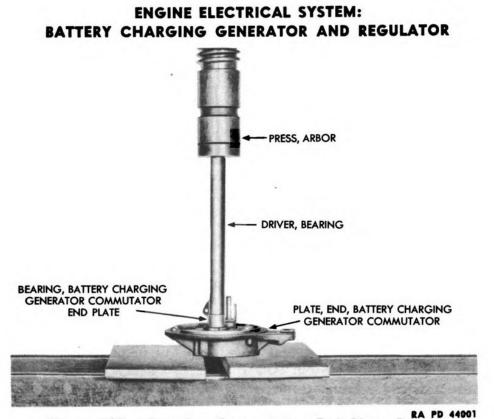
Pressing Commutator End Plate Bearing into End Plate
